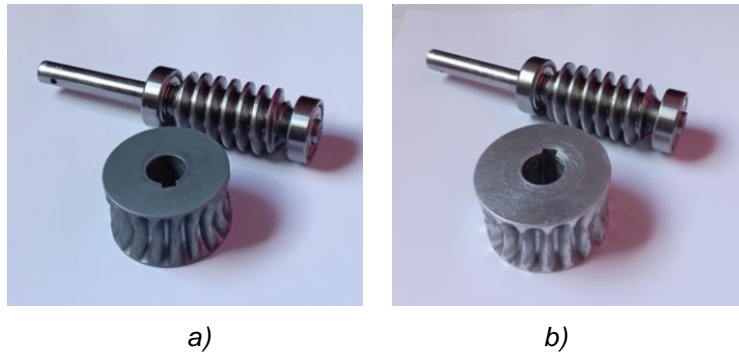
Tested worm gear pairs: a) 42CrMo4/ZA12; b) 42CrMo4/A356
